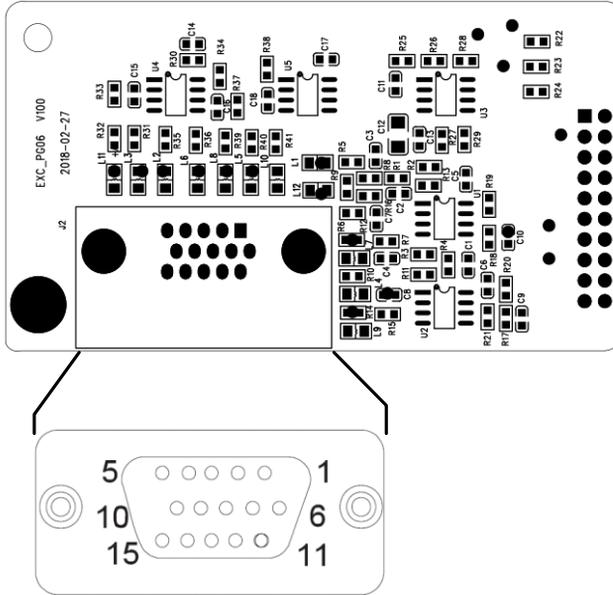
EXC-PG06 Sin-Cos encoder PG card
